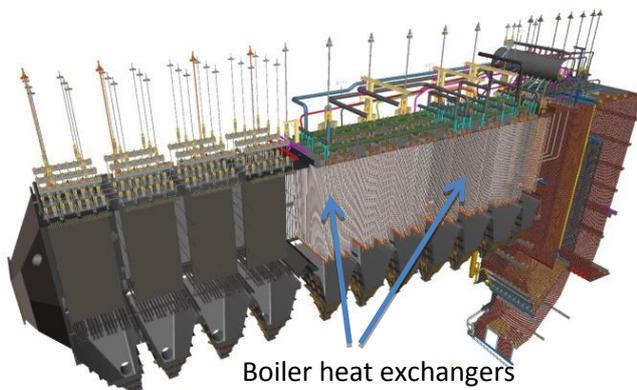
Boiler heat exchanger assembly stationed inside of the boiler
